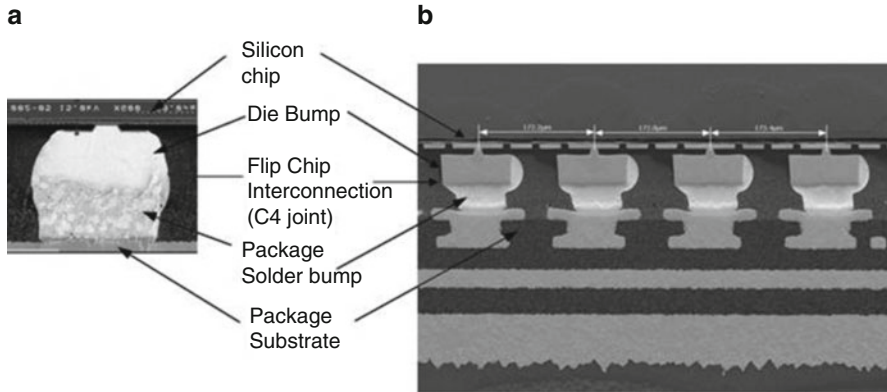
Examples of flip-chip C4 joints. (a) High-lead die bump with eutectic Pb-Sn solder. (b) Cu die bump with SnAgCu solder
